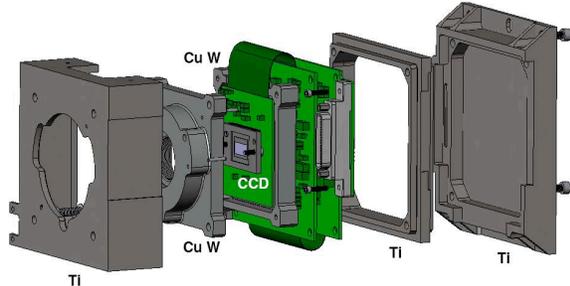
An exploded view of the Junocam camera head electronics, showing the detector sandwiched between two pieces of copper tungsten (Cu W) which form the “CCD vault.”
